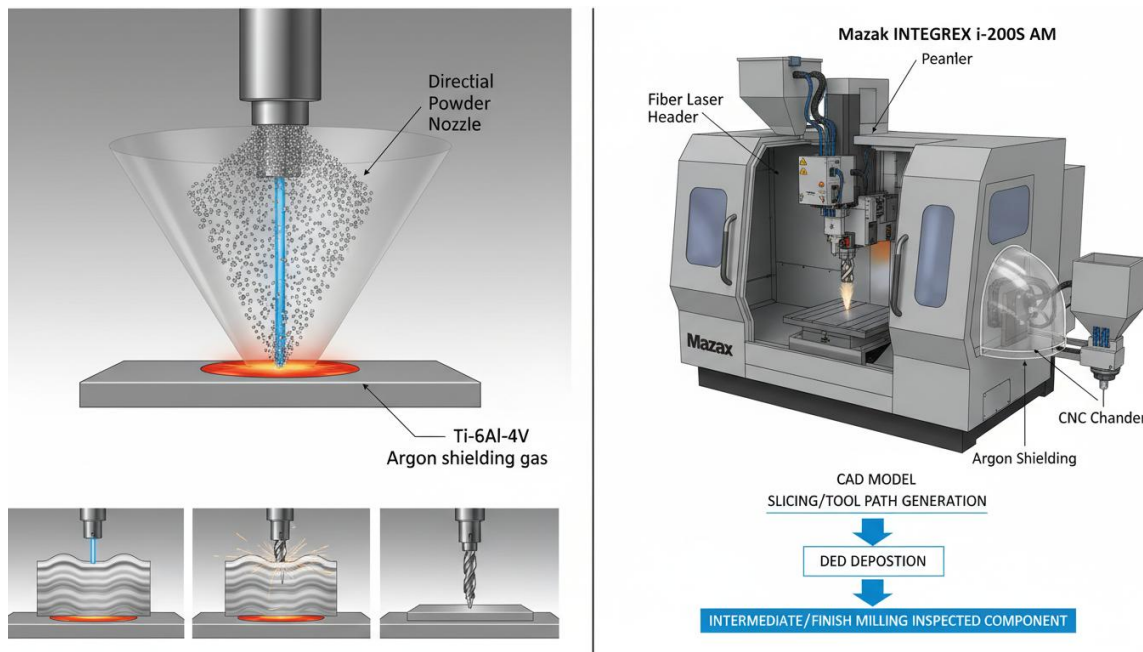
Schematic of the Hybrid DED-Milling Manufacturing Process and Integrated Machine Platform
